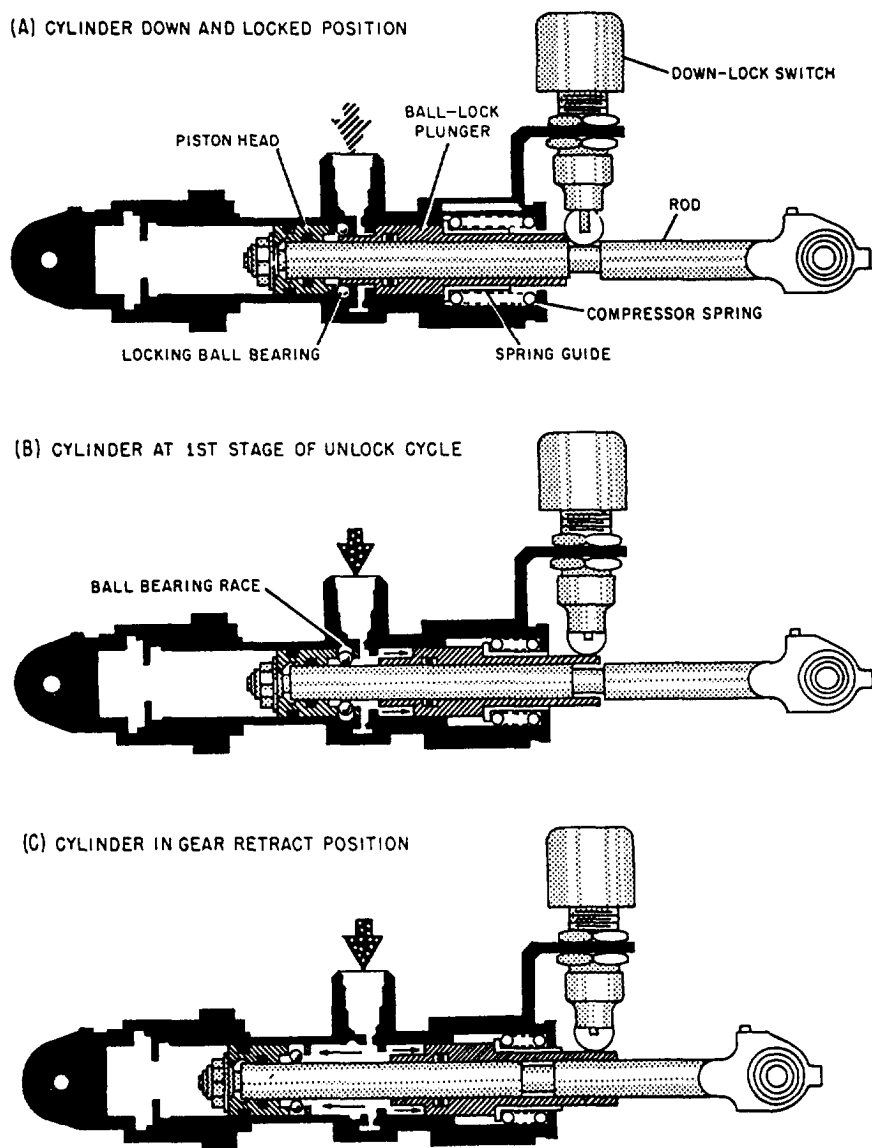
Cutaway of a single-action, ball-lock actuating cylinder.
